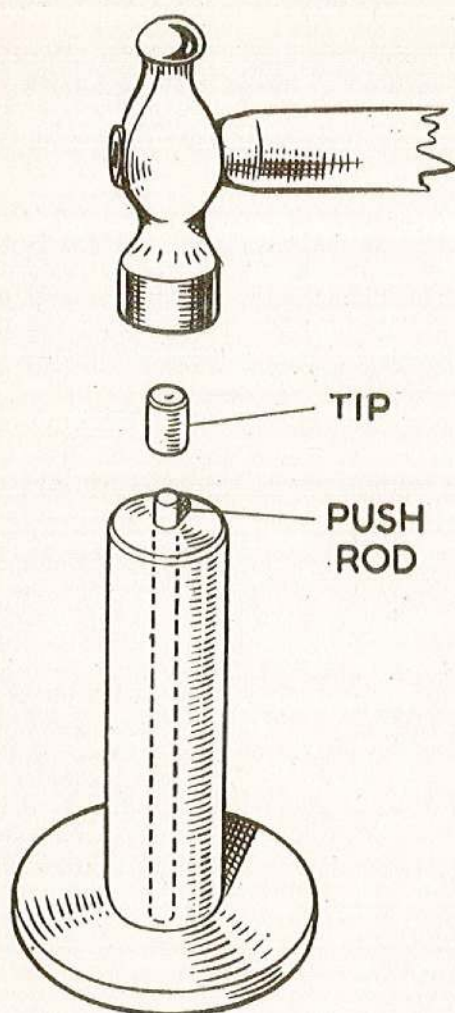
Use of special assembling tool T.164247 for fitting tip to push rod
